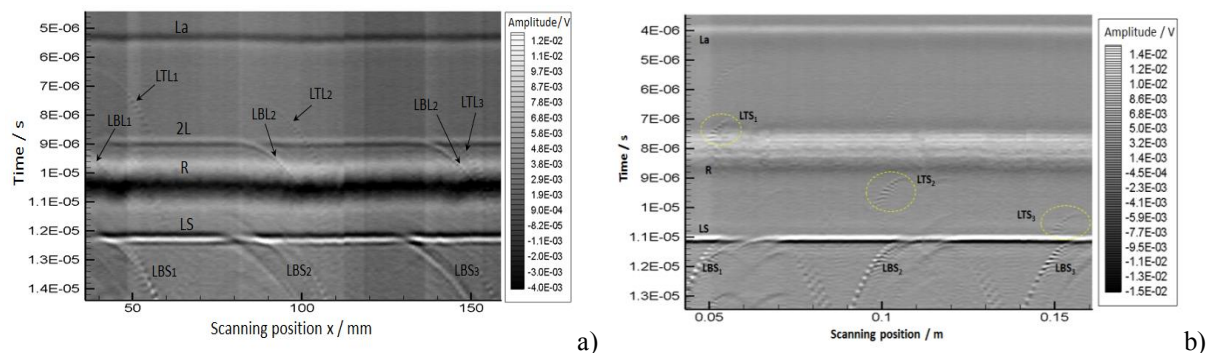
Result of B-scan image of TOFD measurement with using three PA laser beams in a) stainless steel specimen, b) aluminum specimen
